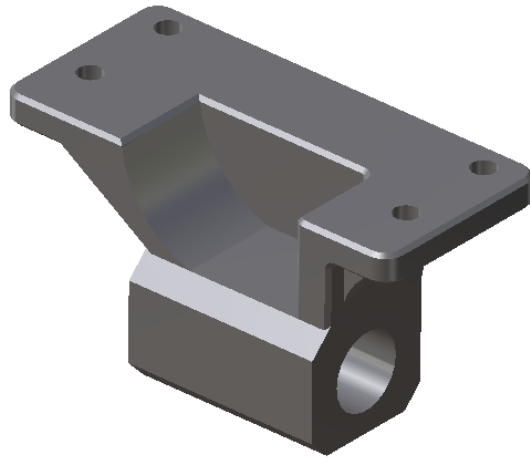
Bottom spindle. This part can rotate freely about the coupler of the four-bar mechanism.
